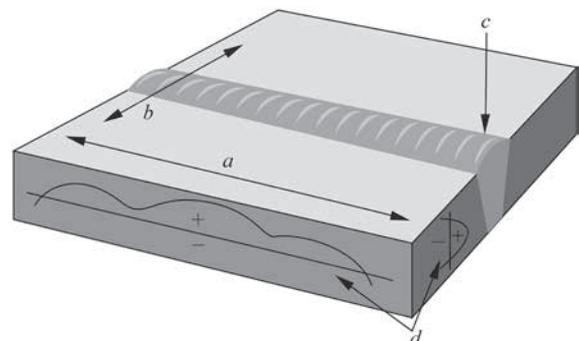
RS induced by welding: a – longitudinal shrinkage; b – transverse shrinkage; c – weld seam; d – stresses
